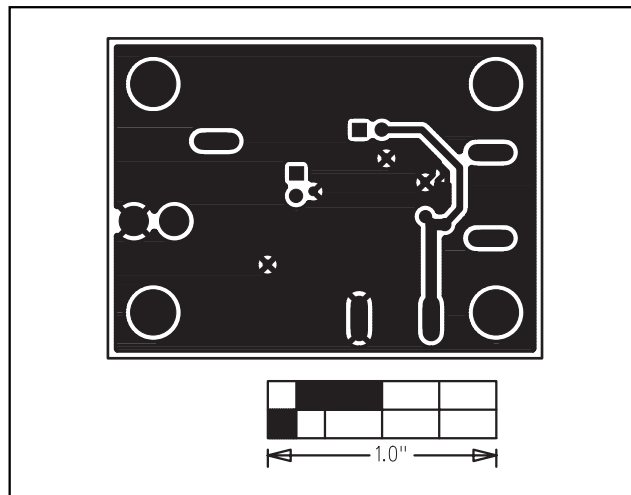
MAX4364 EV Kit PC Board Layout—Solder Side
